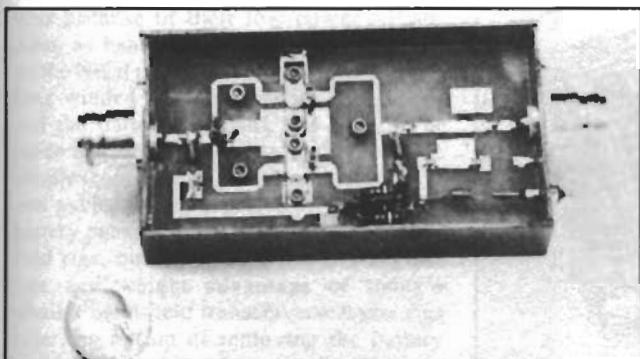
This prototype 4-W amplifier was built on a PC board with a spare driver stage that's bypassed with a brass strip.
